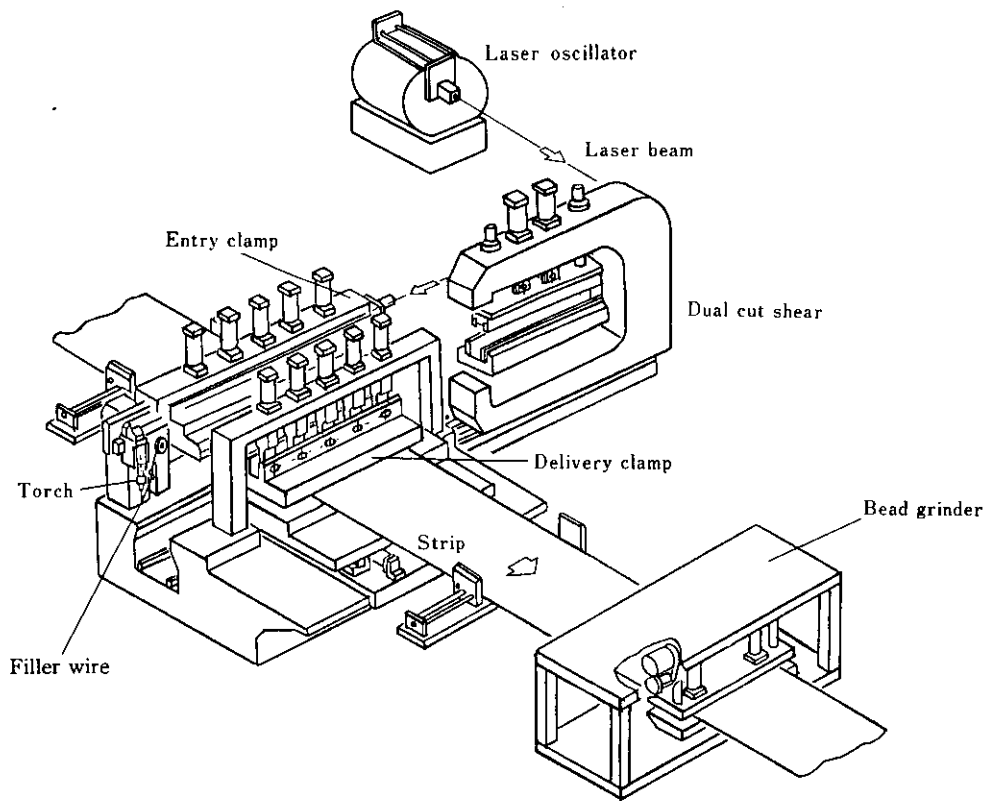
Schematic diagram of laser welder and bead grinder
